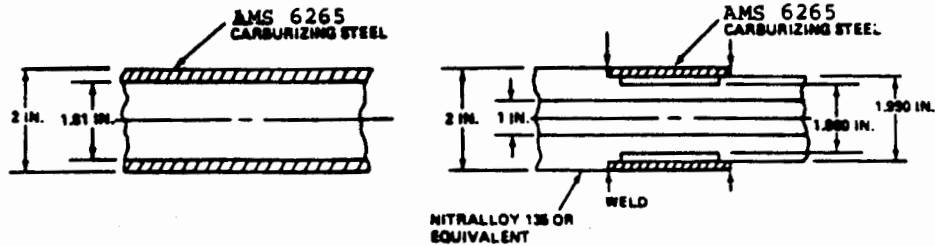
TORQUE TRANSDUCER (SHAFT) TEST SECTIONS
